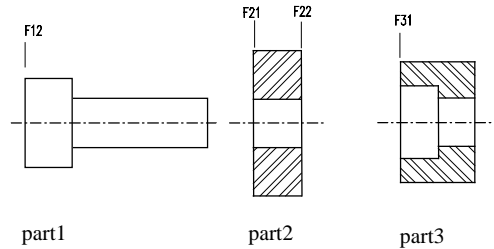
Axial contact surfaces in the assembly shown in figure 4(b)
